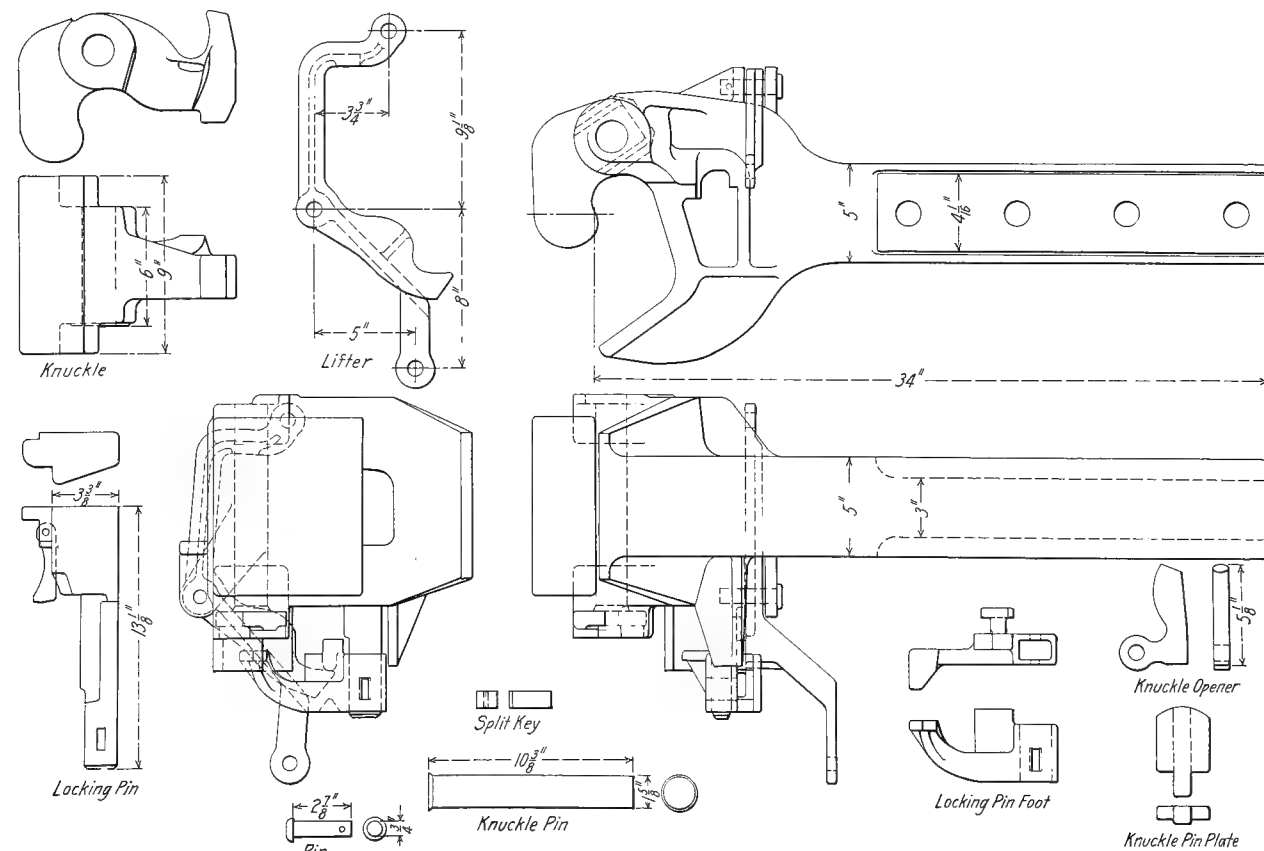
Pitt Passenger Coupler, No. 171—SP2. McConway & Torley Company.
